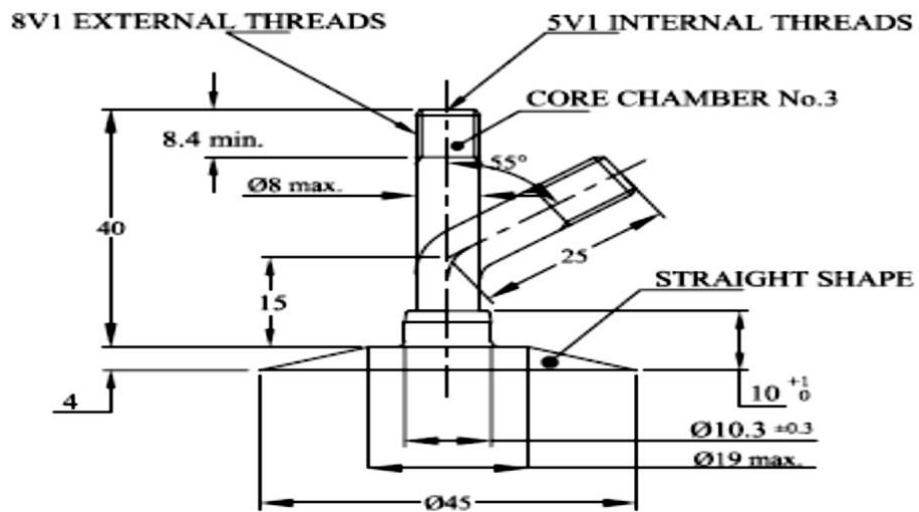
TUBELESS CLAMP-IN PASSENGER CAR VALVES
